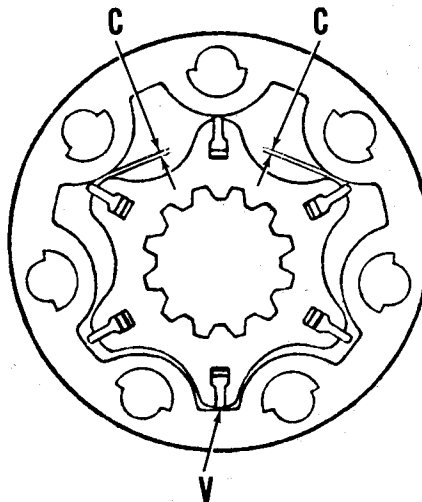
With rotor positioned in stator as shown, clearance "C" must not exceed 0.006 inch. Refer to text.
